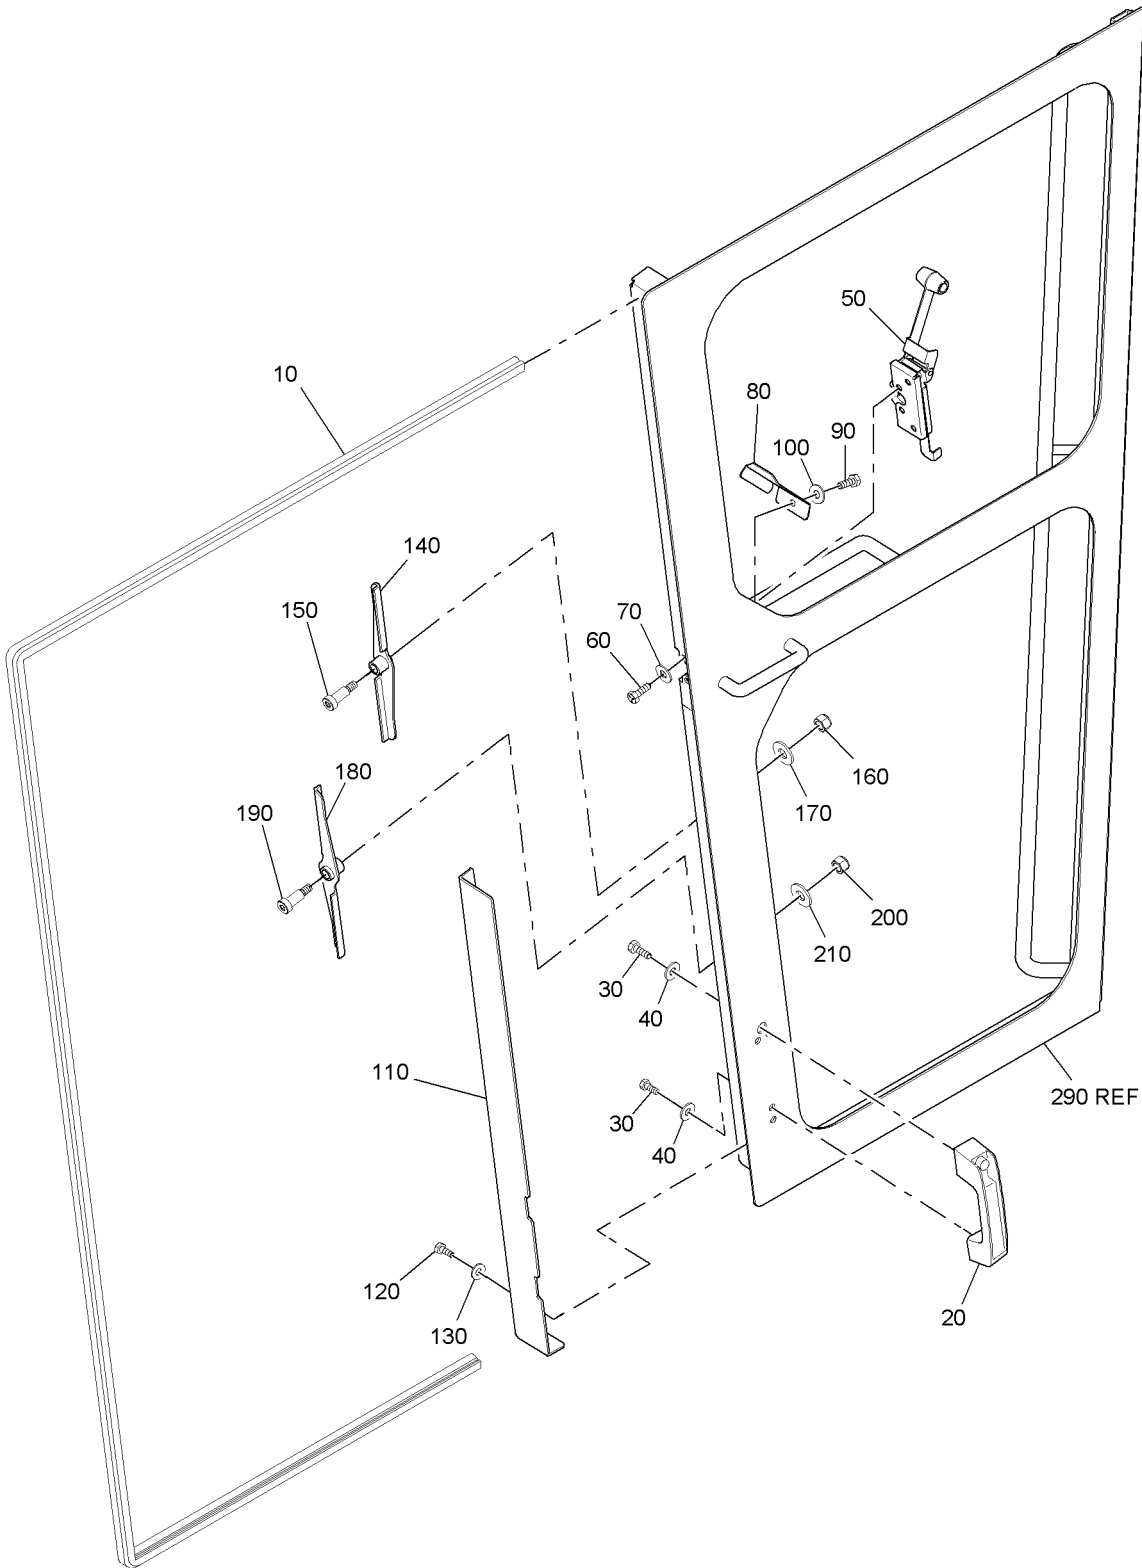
LEFT-HAND DOOR ASSEMBLY (SHEET 1 OF 2)
